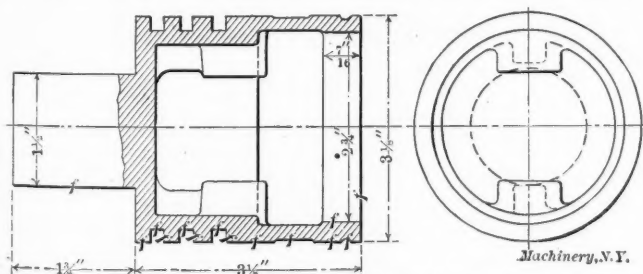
Piston finished on a Cleveland 2-inch Automatic Screw Machine.
